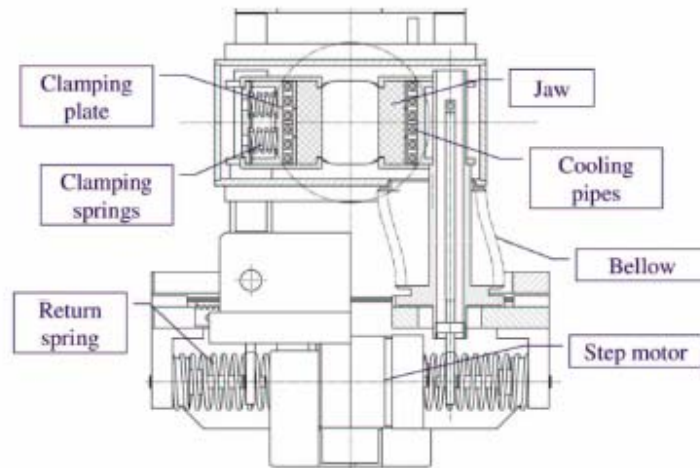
Secondary collimator mechanical assembly (cross-section of a horizontal TCSG).
